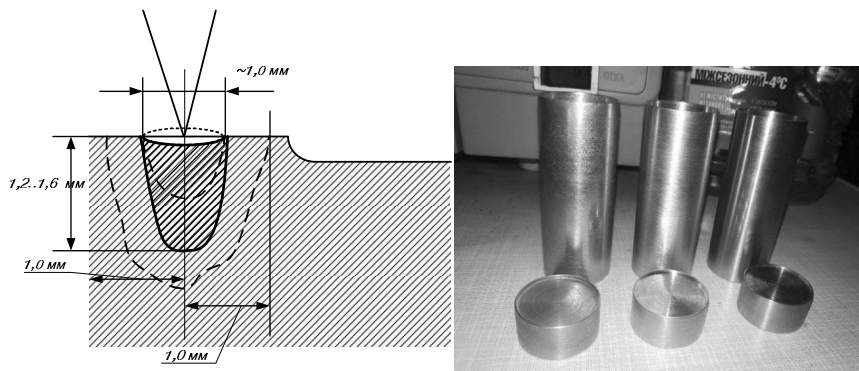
Welding diagram of a container with a lid and the intended melt pool
